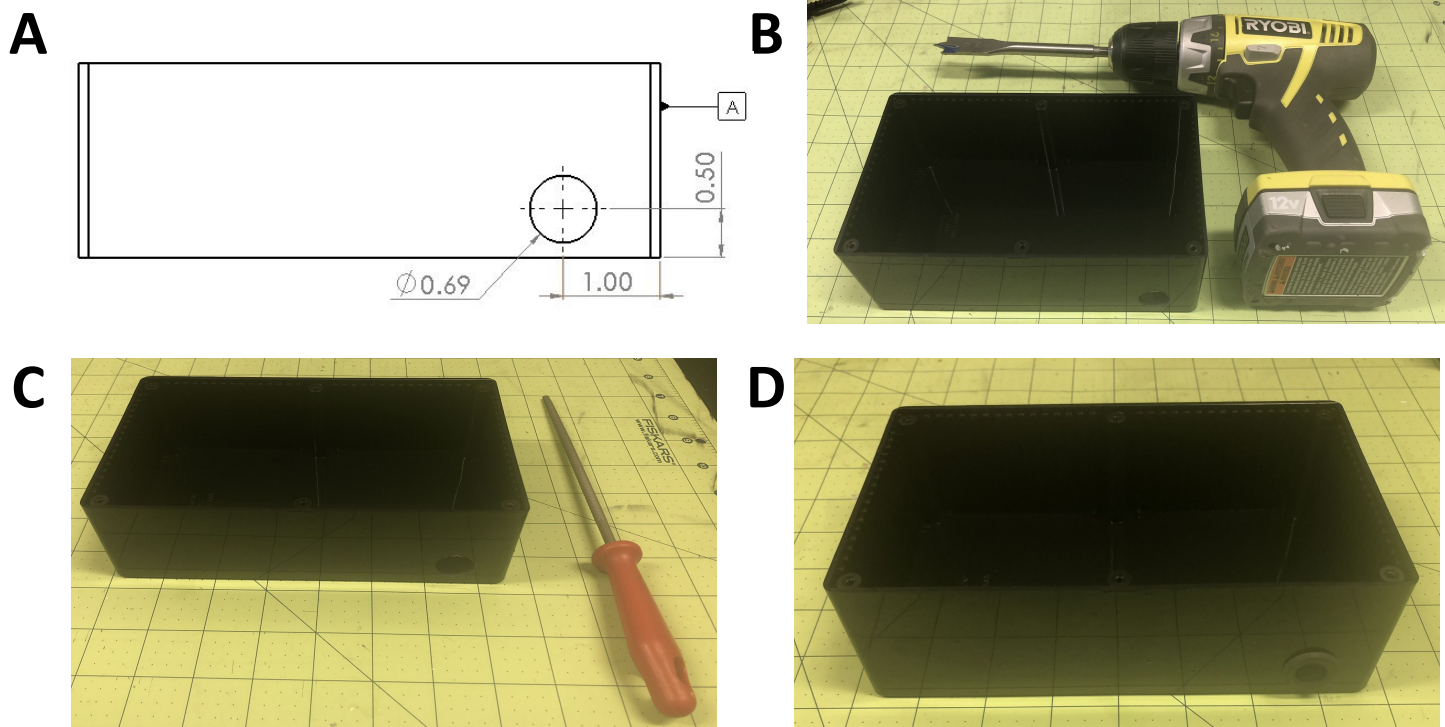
Preparing the wire outlet hole. (A) A CAD drawing with annotated dimensions. (B) Image of the drilled hole with the drill bit. (C) Smoothing of outlet hole with Dremel or filing tool. (D) Placing grommet in outlet hole.
